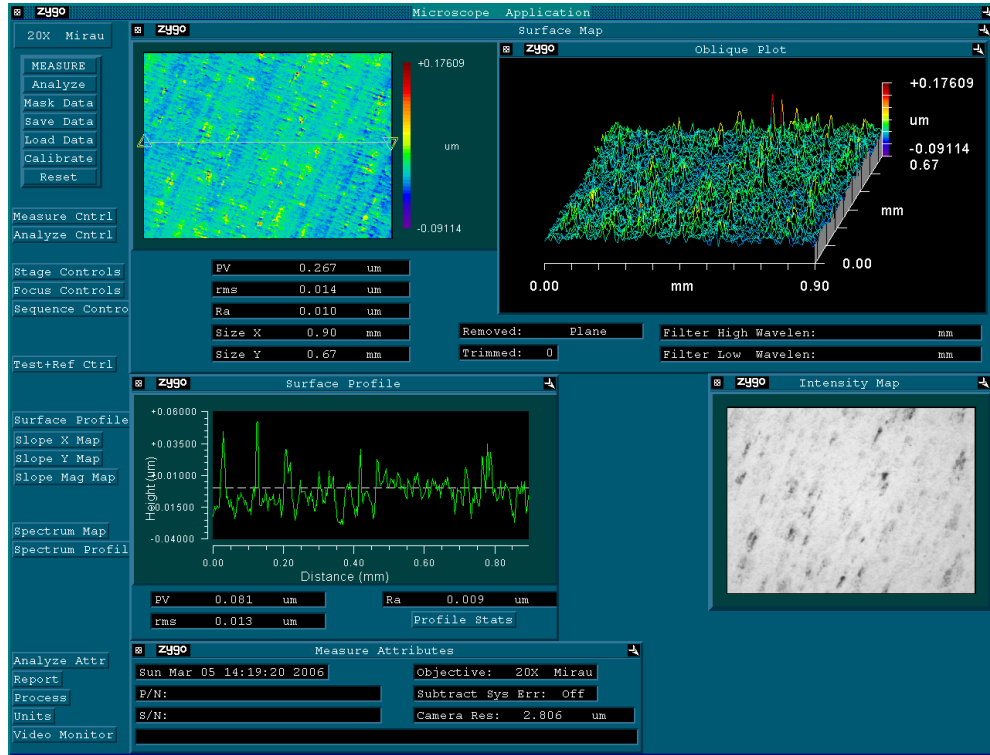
Surface roughness of the mirror surface machined on Machine B
